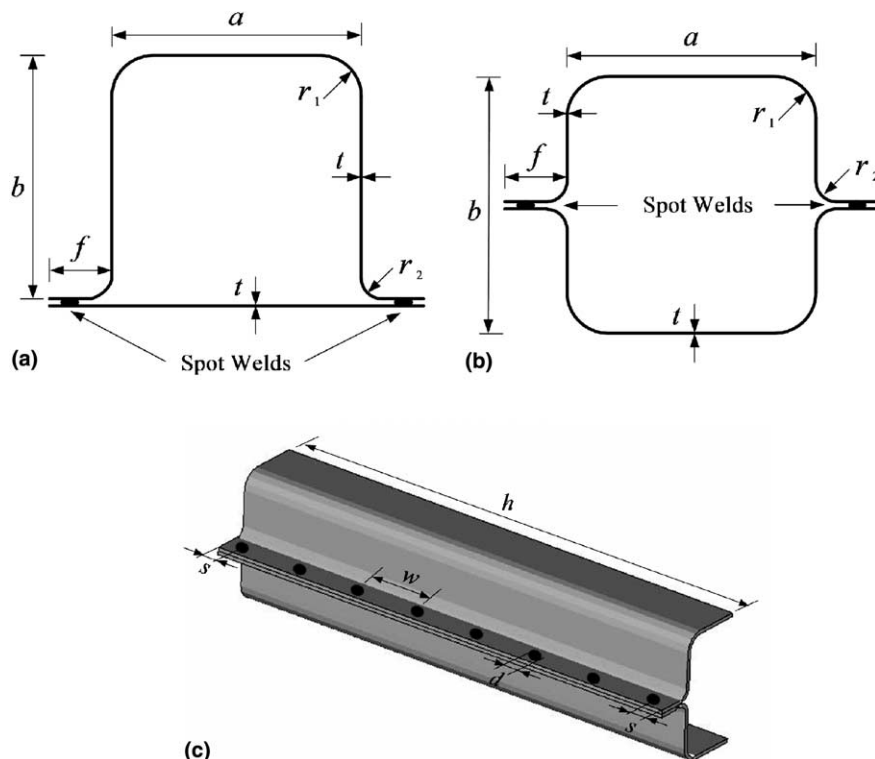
Specimen geometry and spot-weld characters: (a) cross-section of a top-hat specimen; (b) cross-section of a double-hat specimen; (c) spot-weld arrangement, demonstrated in half of the double-hat.
